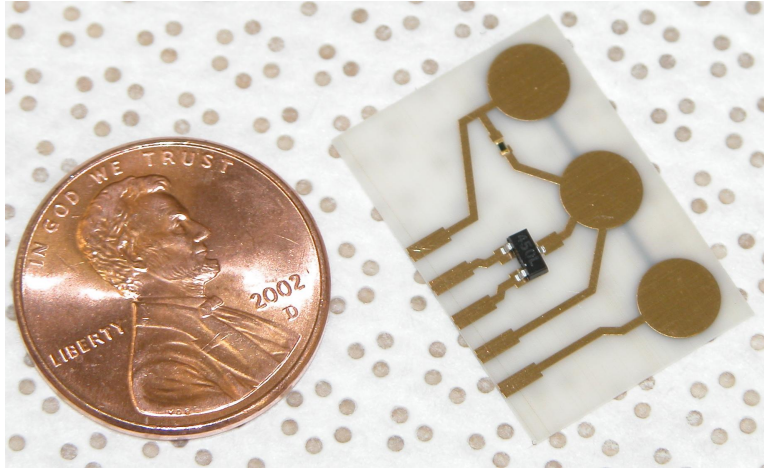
The latest prototype front end electronics board. The board is fabricated on CuFlon, a Teflon[®] circuit board material 15 mils thick. The circular metal pads are filter capacitors built into the board layout. The board holds the FET and feedback resistor, both bare die on silicon substrates with wirebond connections to the circuit board.
